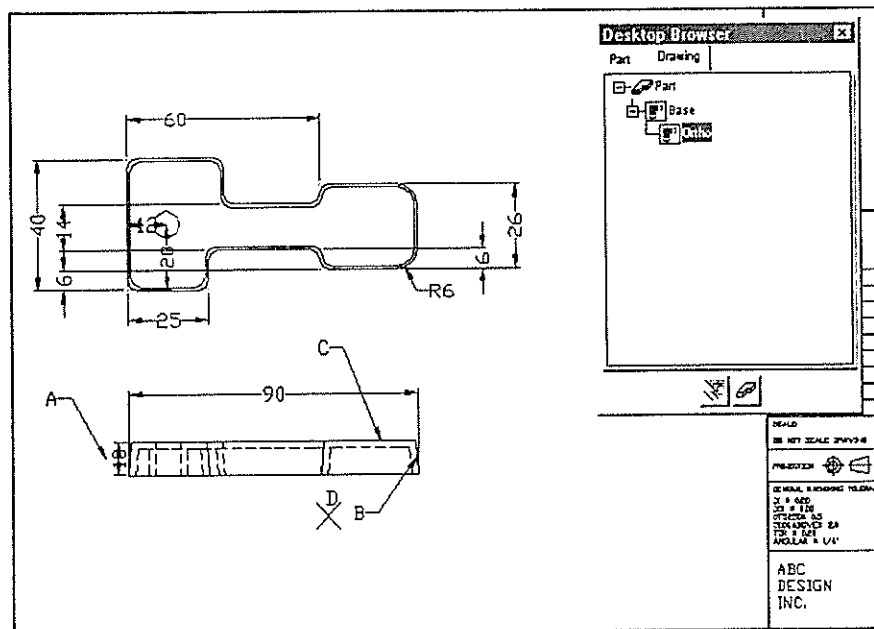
Dimension moved, dimensions aligned, and dimensions joined
